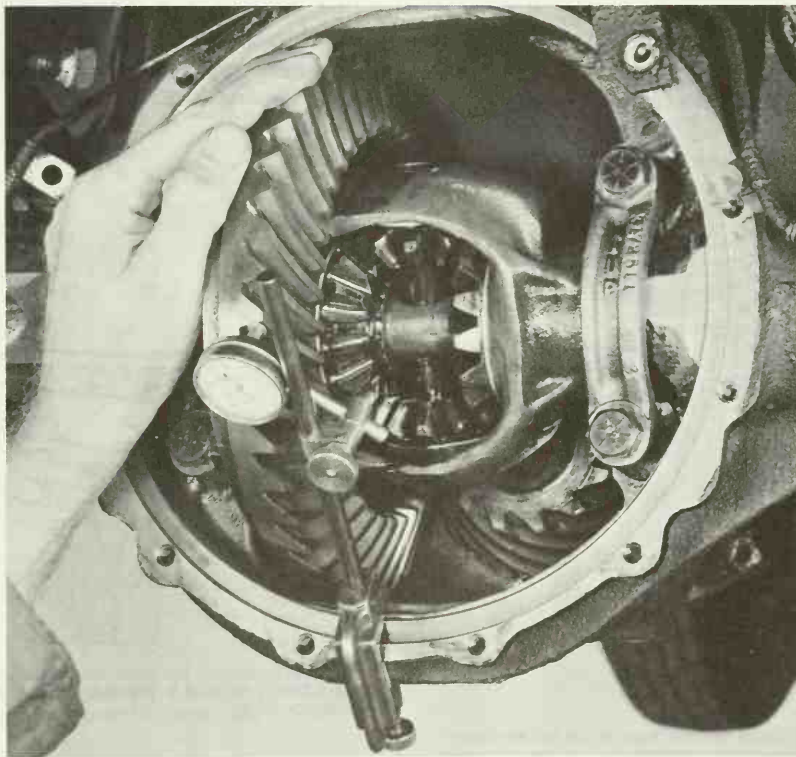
Rocking the ring gear back and forth against the dial indicator with the drive pinion held will indicate backlash. (American Motors Corporation)
